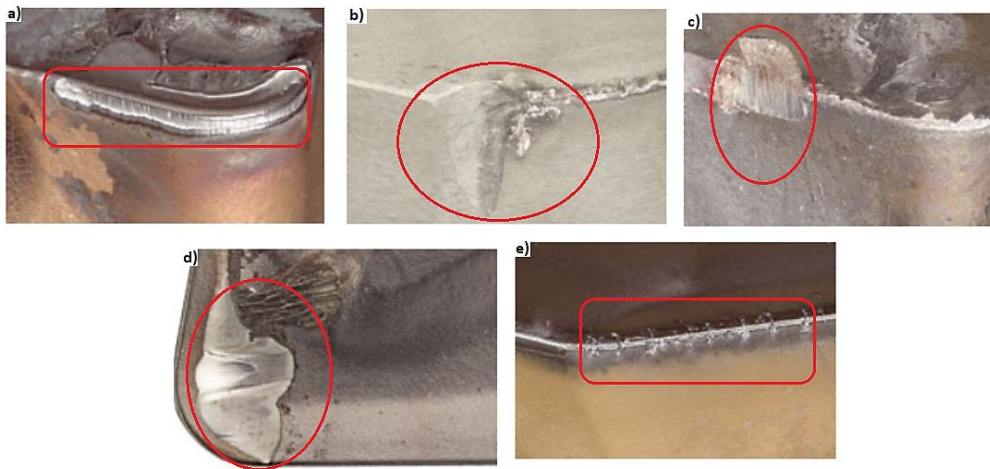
Wear mechanisms on the CT, a) Flank wear, b) Notch wear, c) BUE, d) Crater wear and e) Thermal crack [18]
